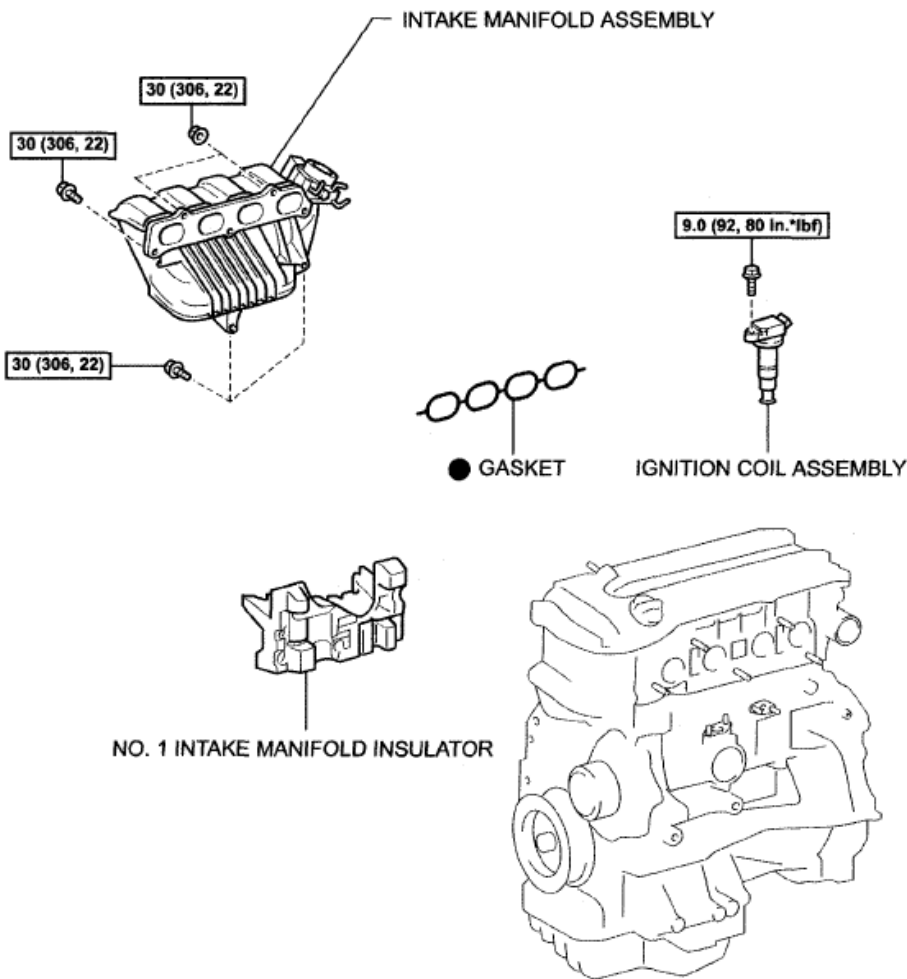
Identifying Engine Assembly Components With Specification (9 Of 11)
